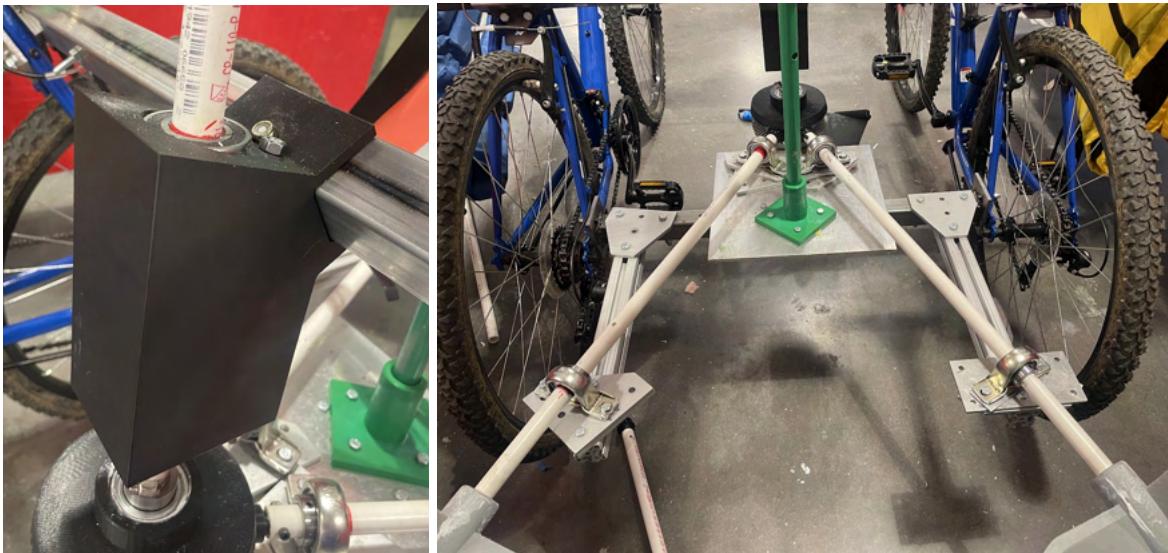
Hand Crank Shaft Support Block and Aluminum Support Frame
